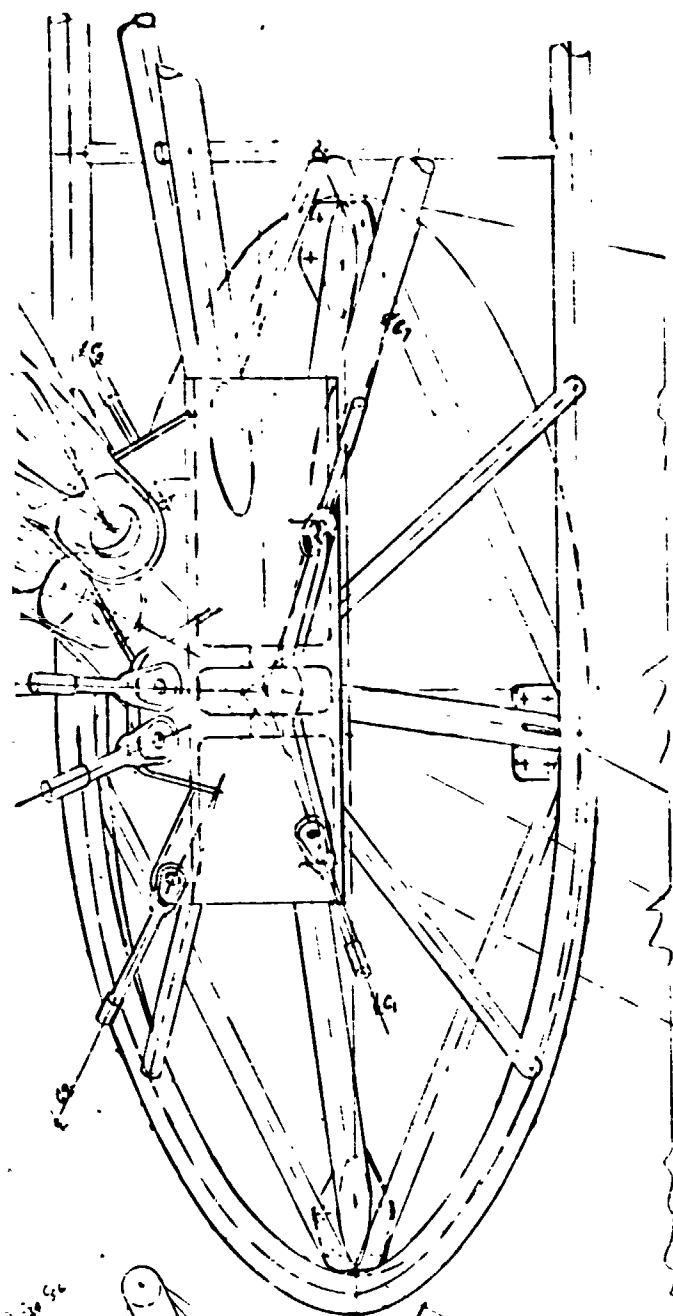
LF2 JOINT CONSTRUCTION
